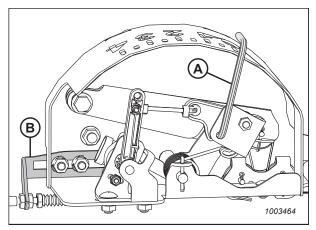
Float Indicator Box (5 Volt AHHC Sensor Assembly Shown)
